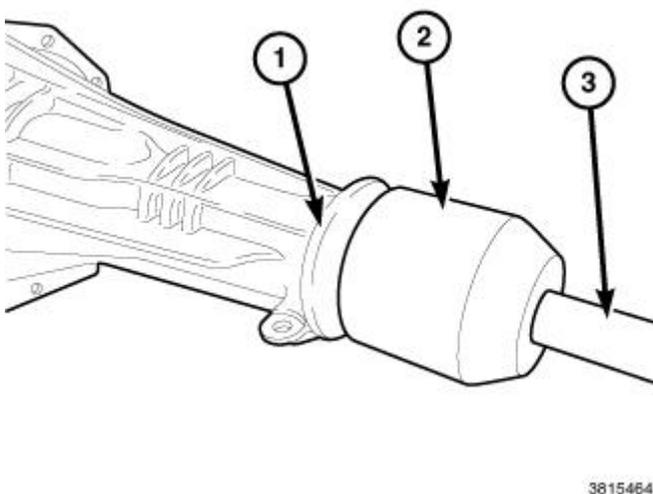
Identifying Extension Housing, Installer, & Driver Handle
